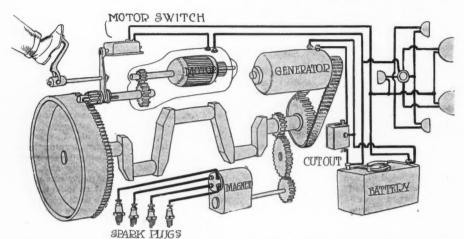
Typical arrangement of three-unit system of cranking, lighting and ignition. This shows mechanical and electrical connections of the separate units, the cranking motor, lighting generator and ignition magneto
